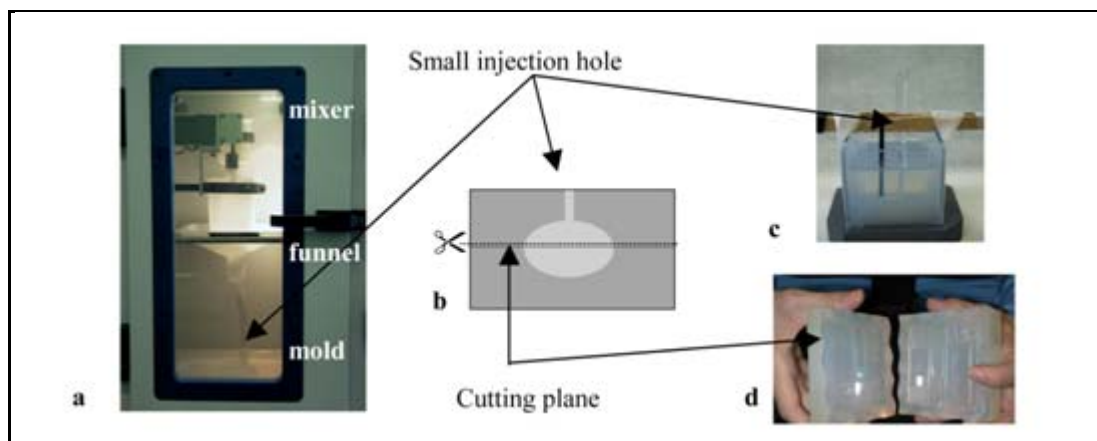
Vacuum casting process, where: a-Vacuum casting machine, b-Drawing of silicone mold, c-Embedding of the master component in silicone rubber, d-Opening of the mold to remove the replicated part in polyurethane.
